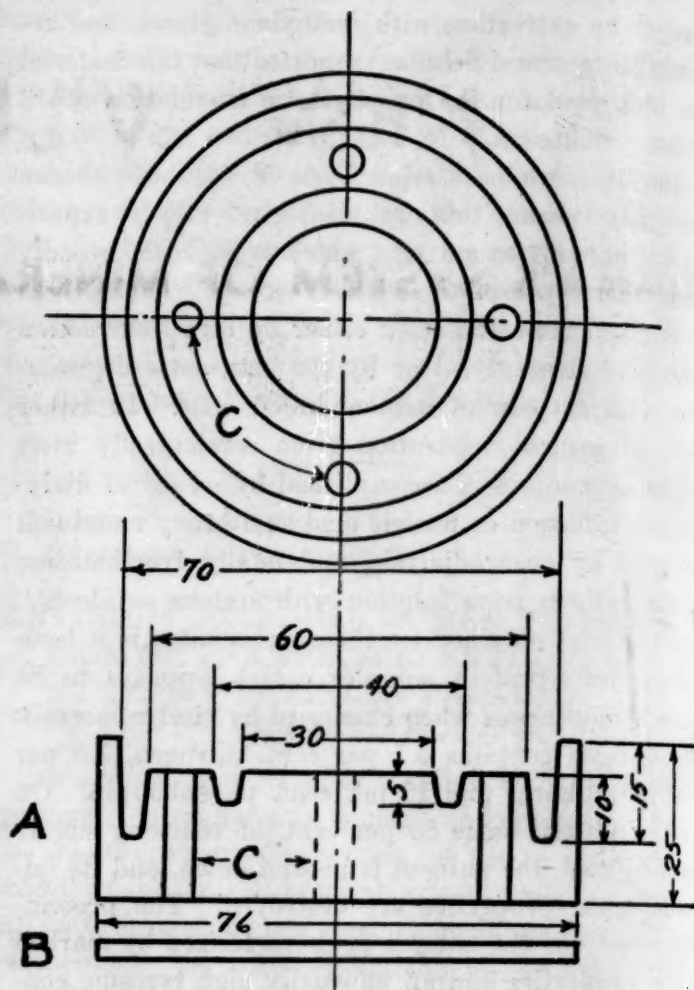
A. Cross-section of mold. B. Circular metal plate for support of rods in holes C. Dimensions in millimeters.
